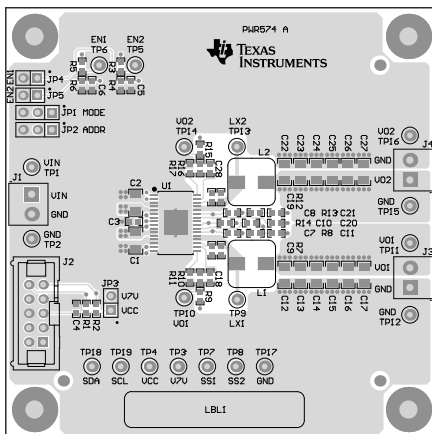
TPS563900EVM-574 Top-Side Assembly
